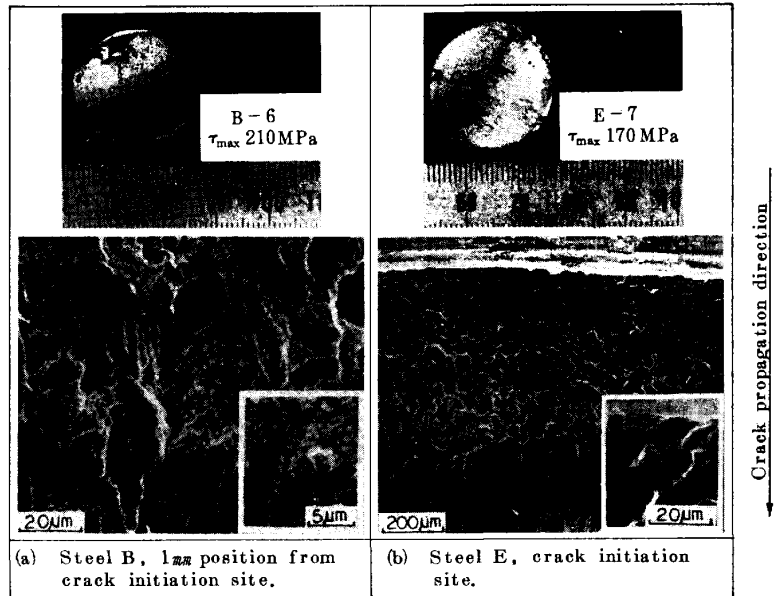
Examples of fatigue fracture surface of shear Pins.
